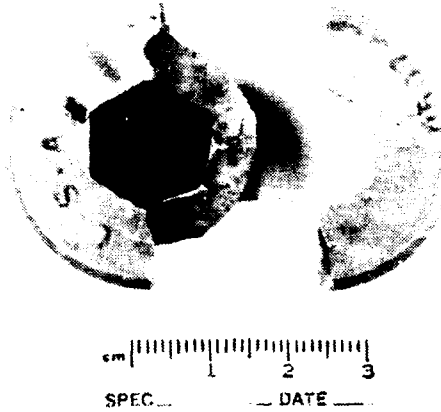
Macrograph of launcher attachment Bolt A showing the fractured head with the identification number 0507. Reduced 5%.
